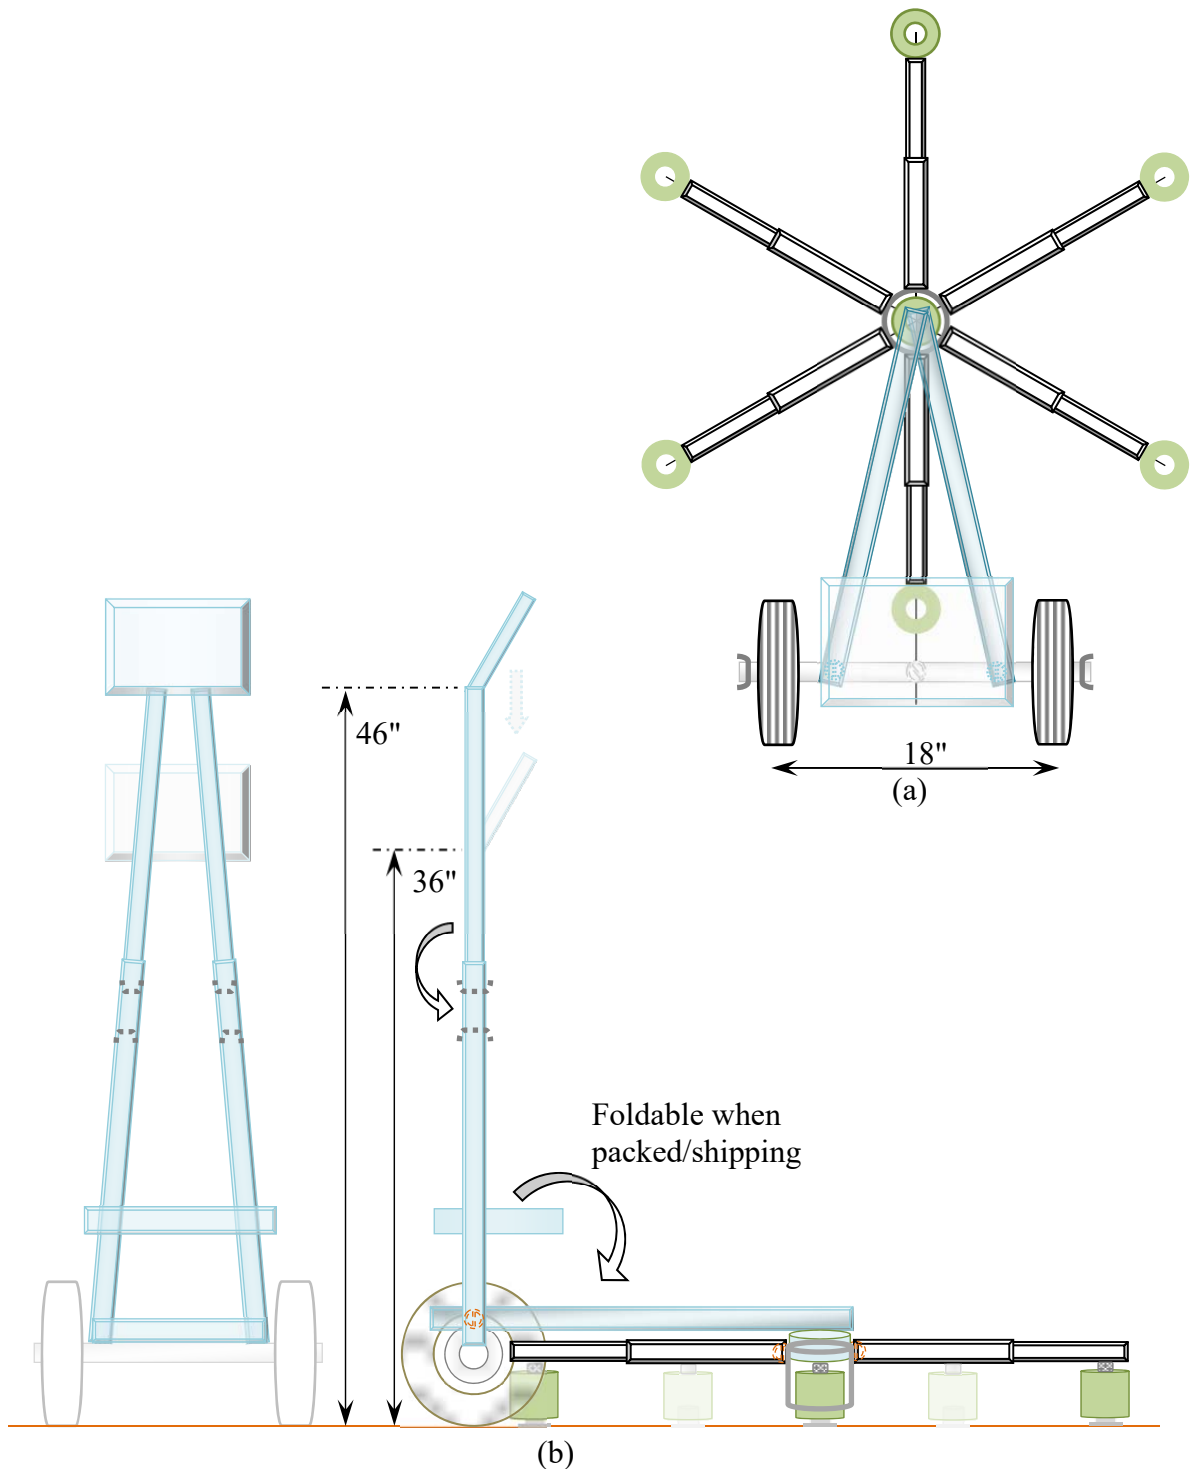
Sensor array and system carriage designs for the project: (a) top view and (b) side views.
